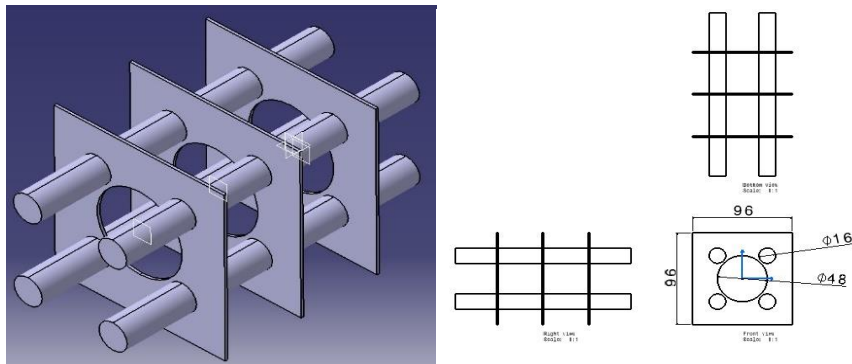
3D Model Tube and Finned Type Heat Exchanger with circular cutout
